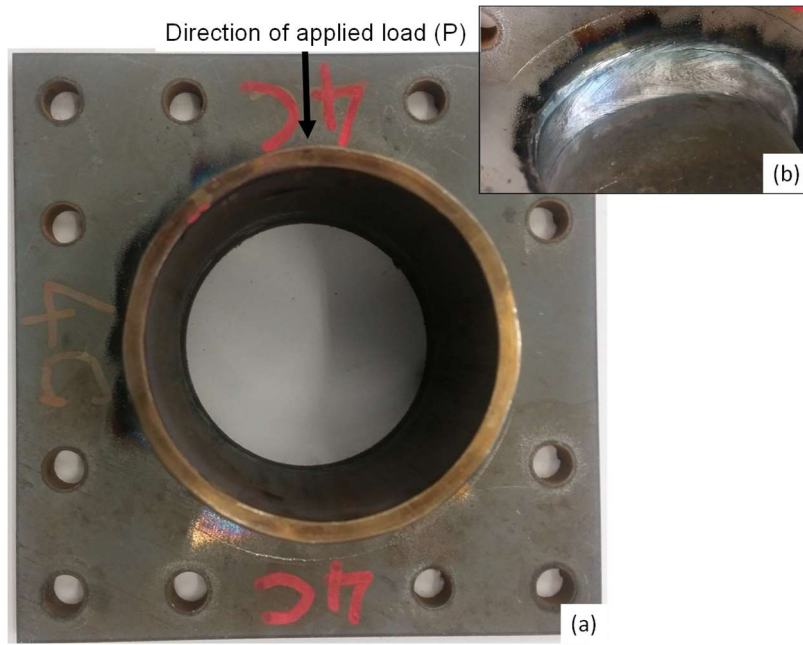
(a) Sample 4C front face. (b) top view of damage observed on the welded specimen
